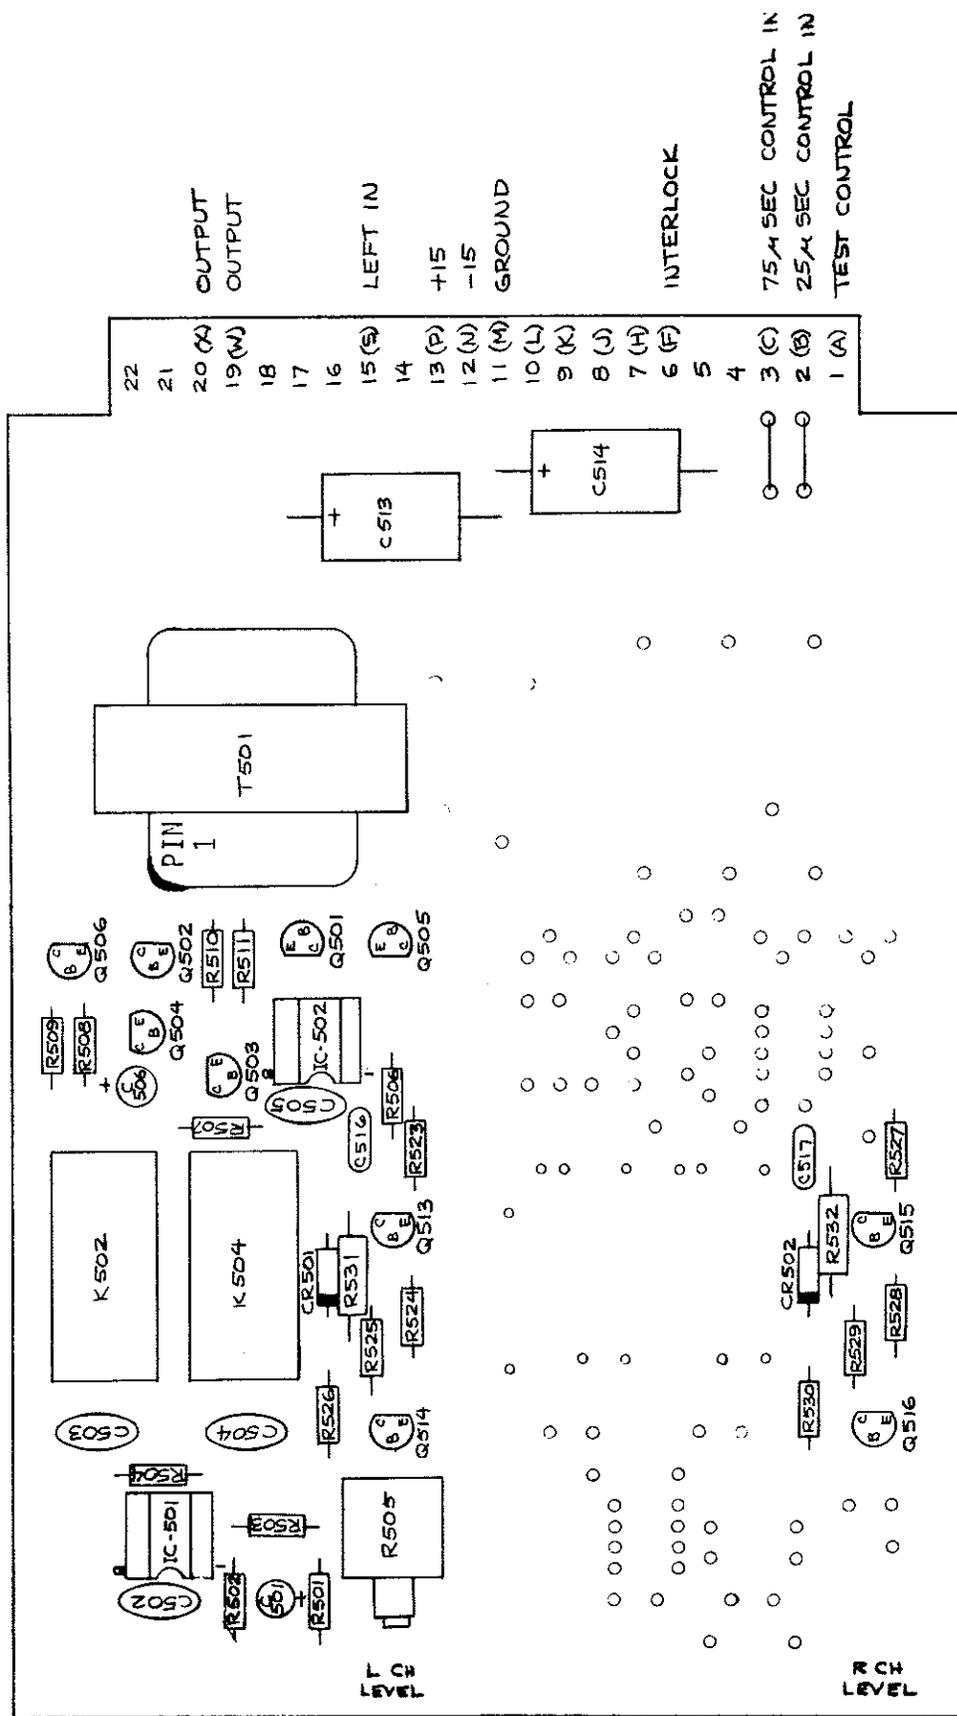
OUTPUT CIRCUIT BOARD ASSEMBLY (DWG. 914-1915)
